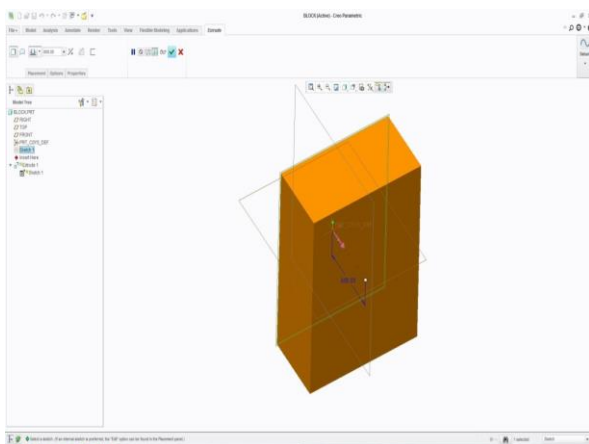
Extrusion of 2D Model of Evaporative condenser
